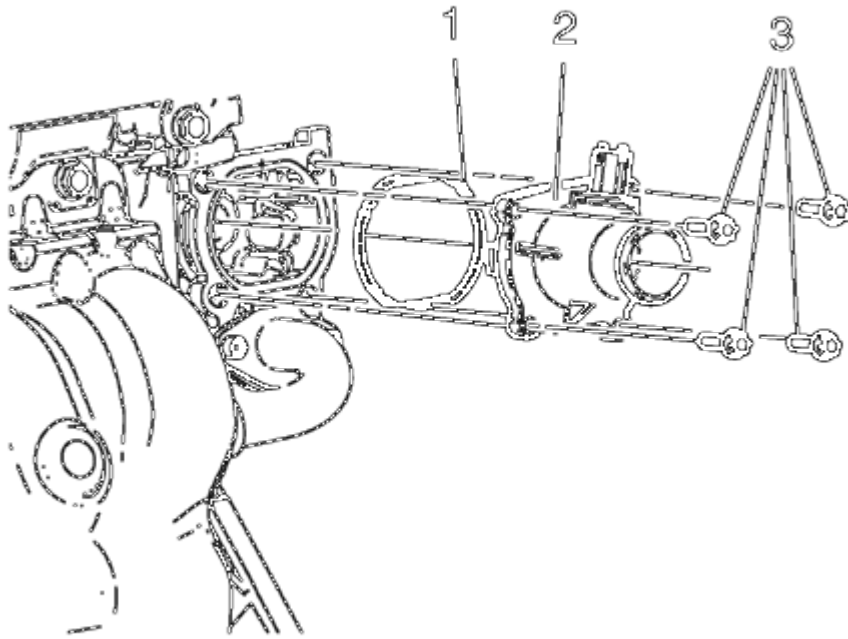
Identifying Engine Coolant Thermostat Assembly
